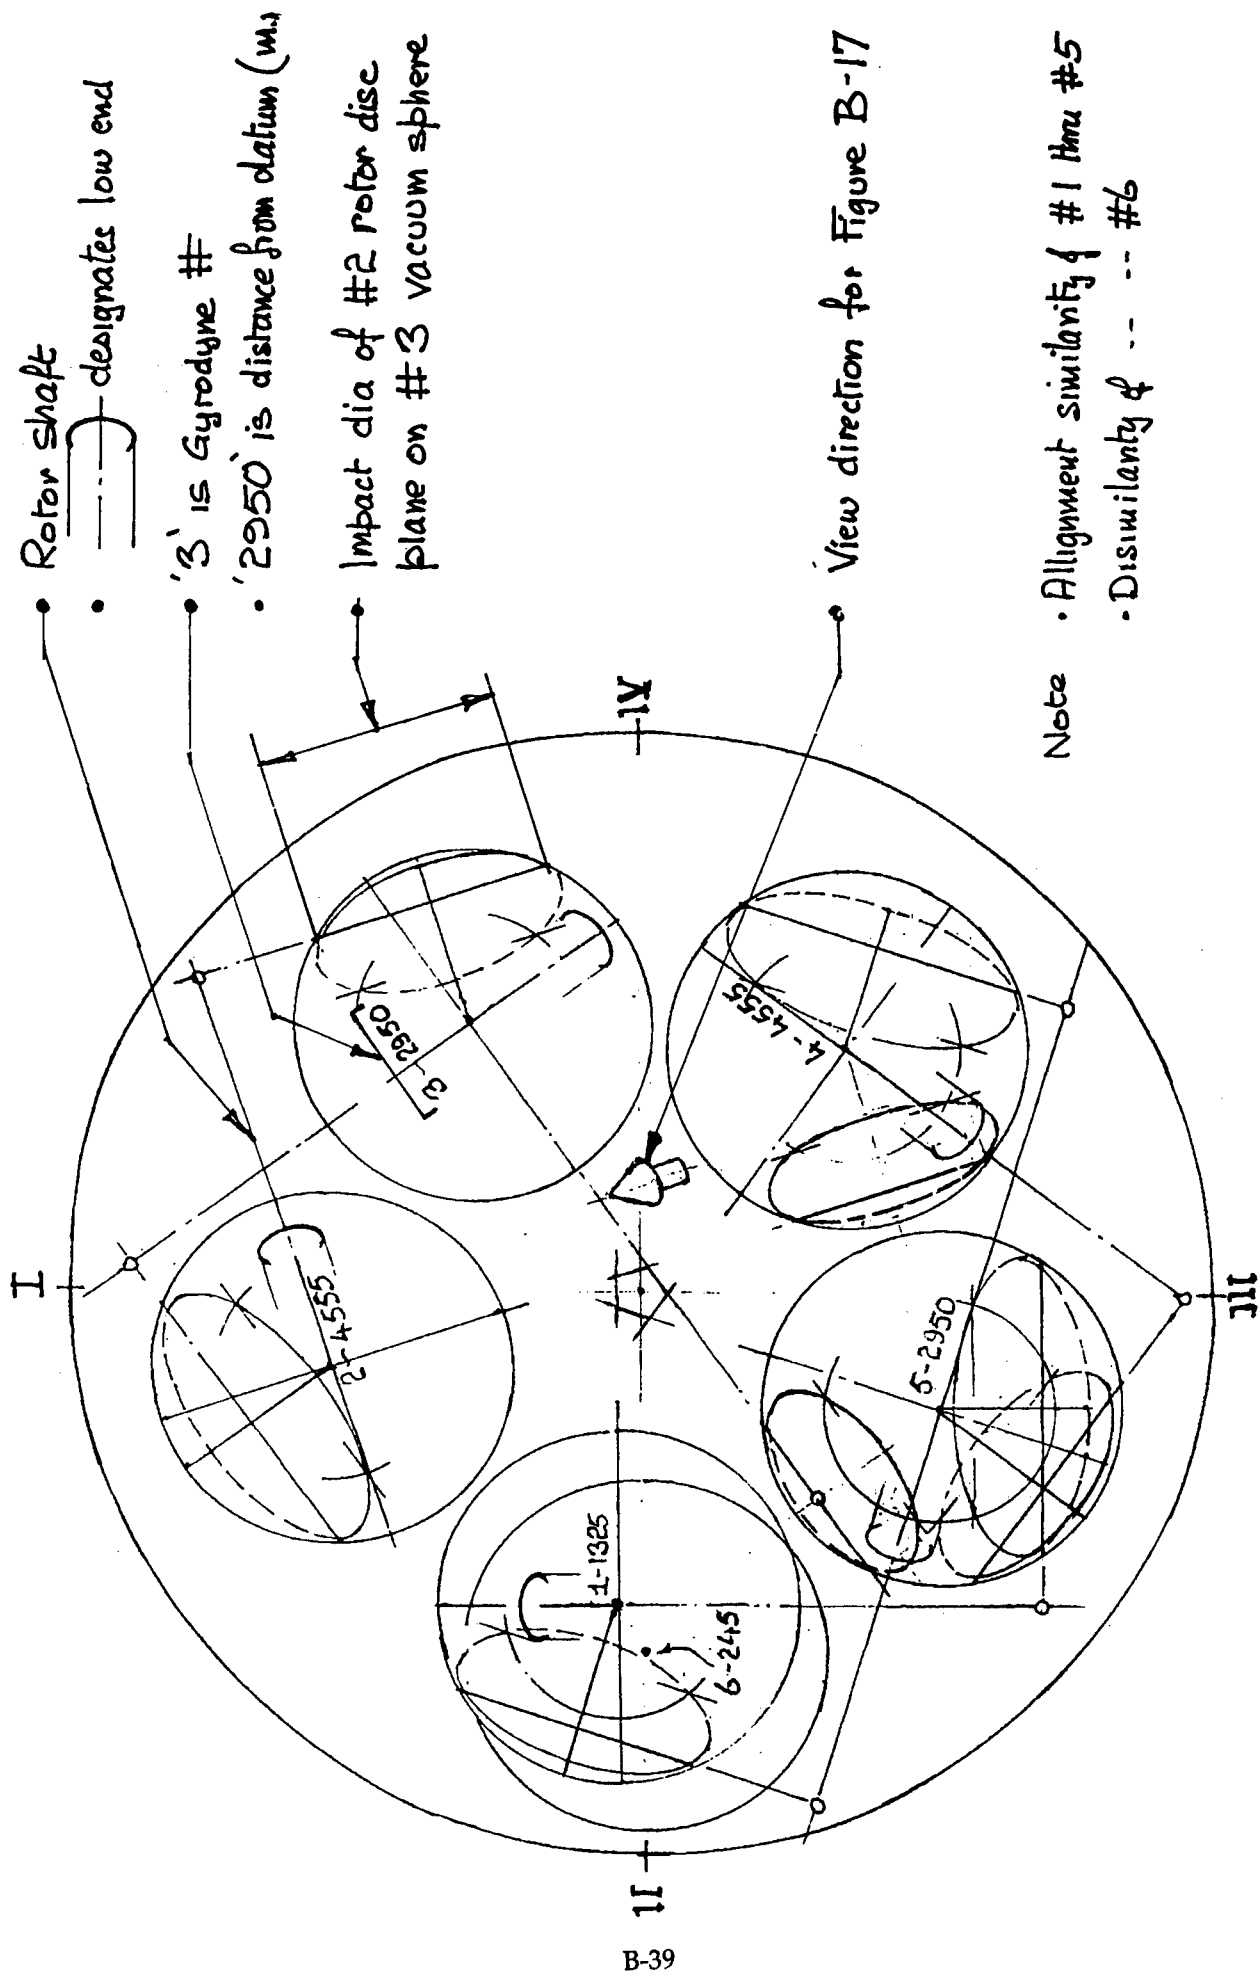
MODULE END VIEW SHOWING GYRODYNE UNIT GEOMETRY
